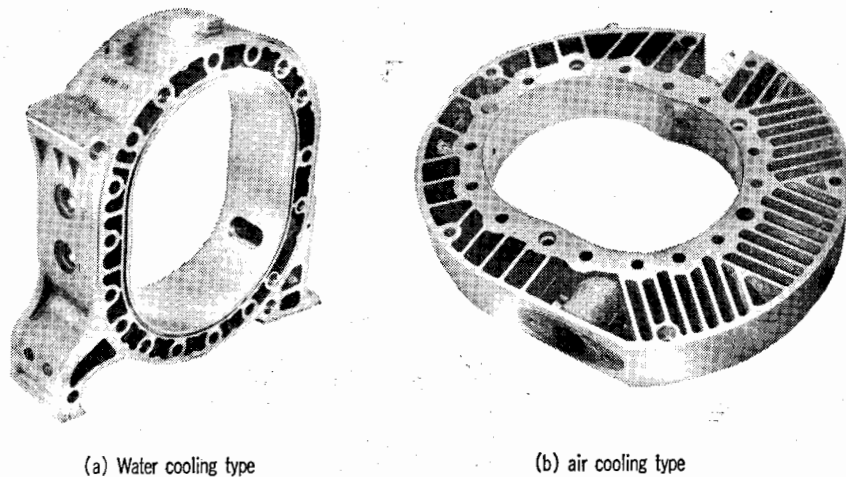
Construction of axial flow-type cooling of rotor housing
